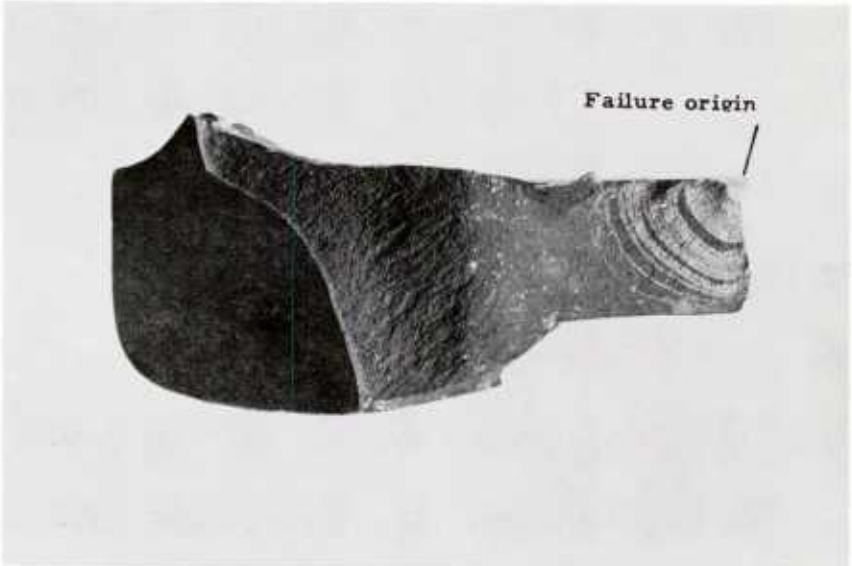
Fracture surface of fatigue failure of wing panel—clear lines of progression of crack at each side of hole.
